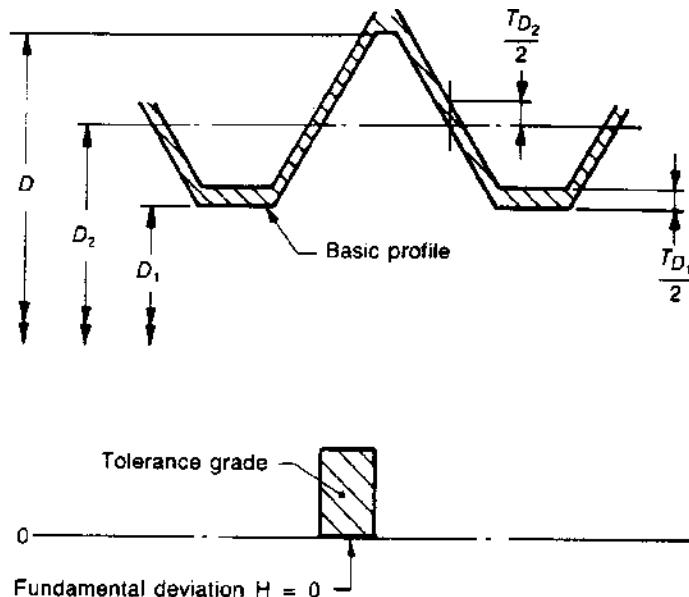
LIMITING PROFILES FOR INTERNAL THREADS—TOLERANCE POSITION H
